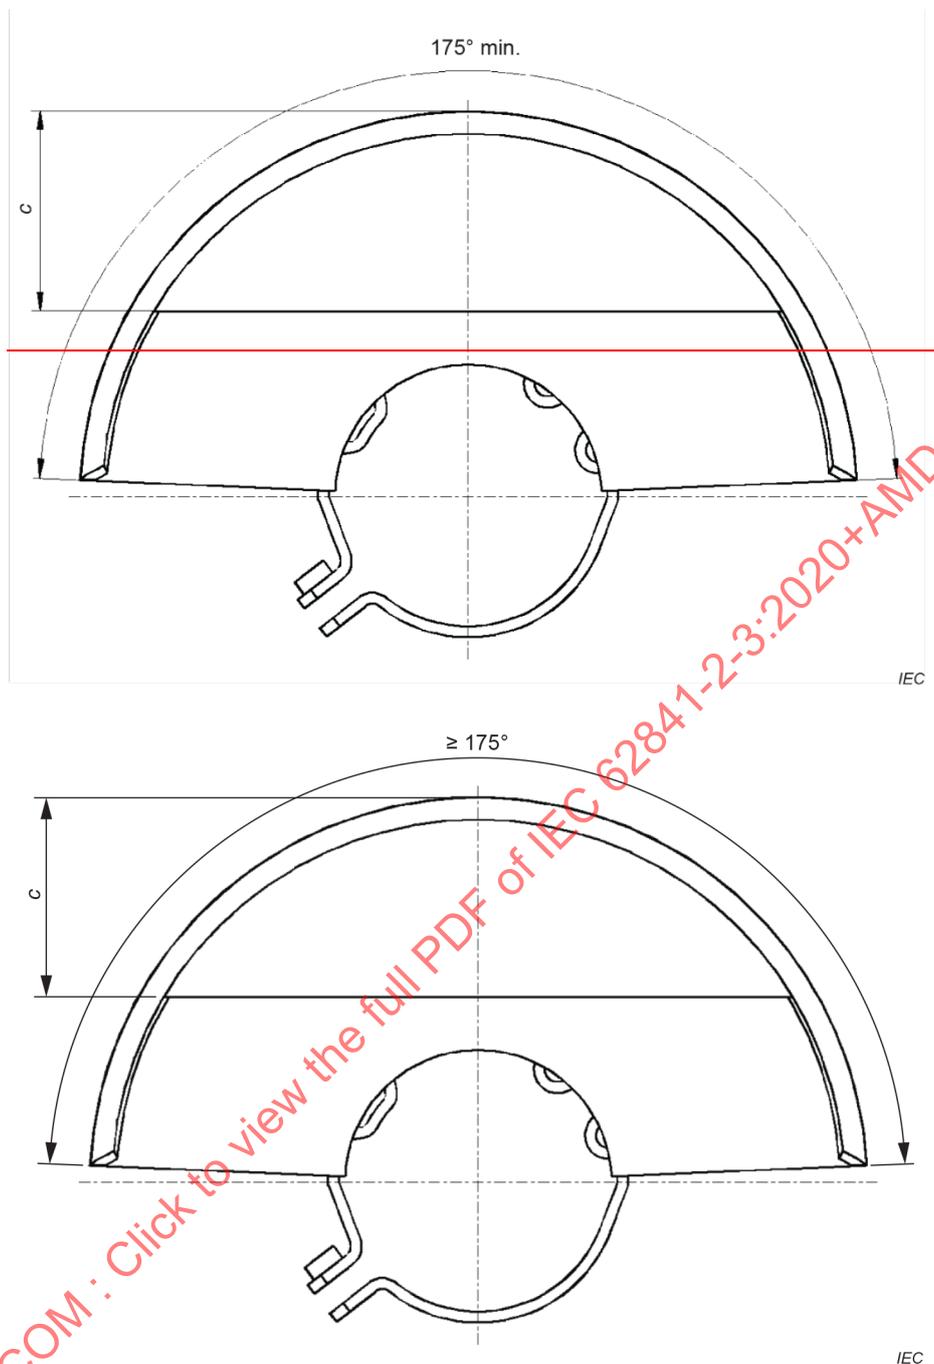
Wheel guard of Type B (grinding wheel guard)
